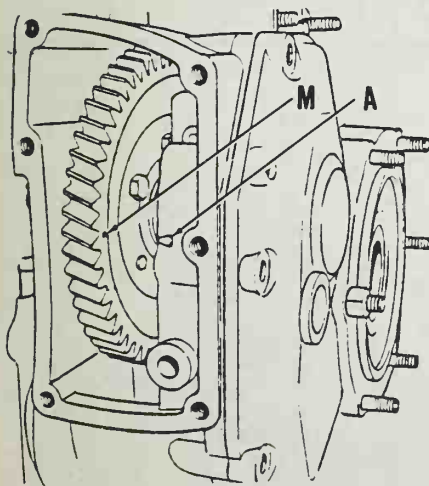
View of camshaft gear timing mark (M) and crankcase mark (A) on Models WD1-340, WD1-350 and WD1-430.
